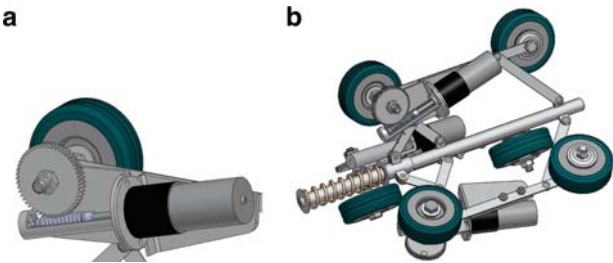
The 3D model of the minirobot in pipe using a motor and reducer
